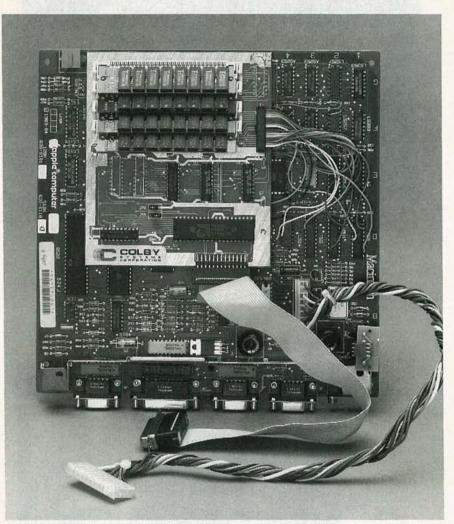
THE COLBY SIMM ADAPTER BOARD requires that 2 DIP's be removed and about 22 wires and a daughter board to be soldered onto the motherboard. It allows you to use standard 256K or 1-MB SIMM's.
